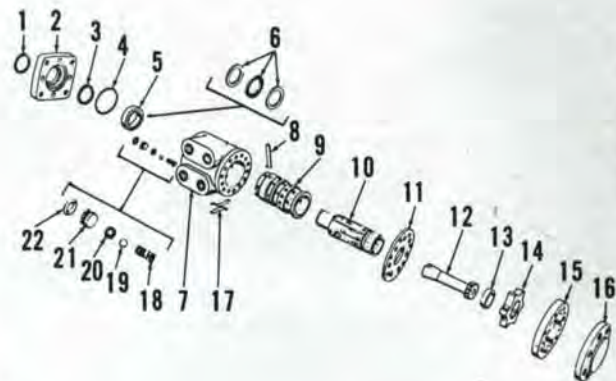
Exploded view of steering control valve. Tractor may have either locator (5) or thrust bearing assembly (6) installed. Centering springs (17) are installed in two packs of three each, arched back-to-back.
